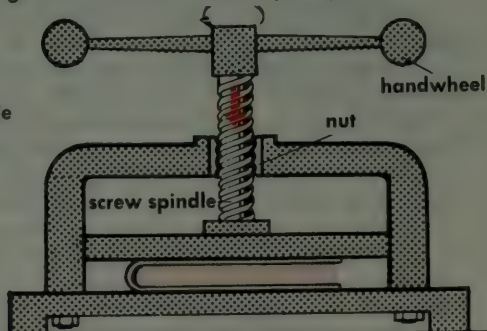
SCREW PRESS WITH HANDWHEEL (FLY PRESS)
